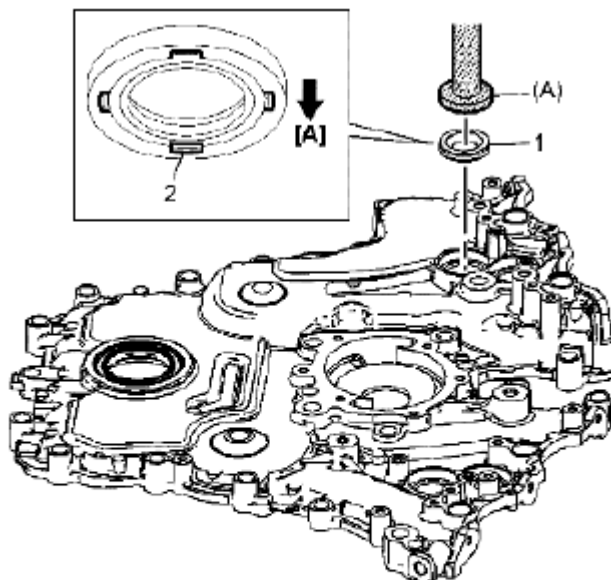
Identifying Crankshaft Oil Seal And Timing Chain Cover
